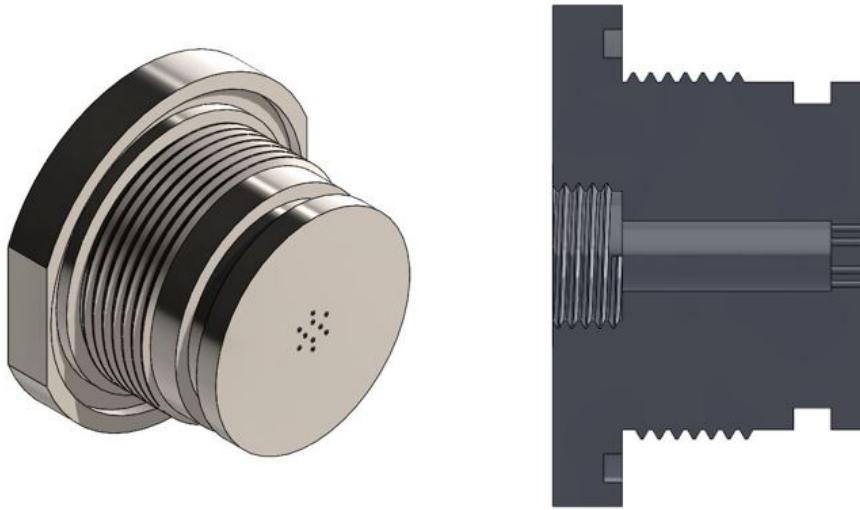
Designed Injector: Isometric View (left), Cross-Sectional View (right). Source: Own.
